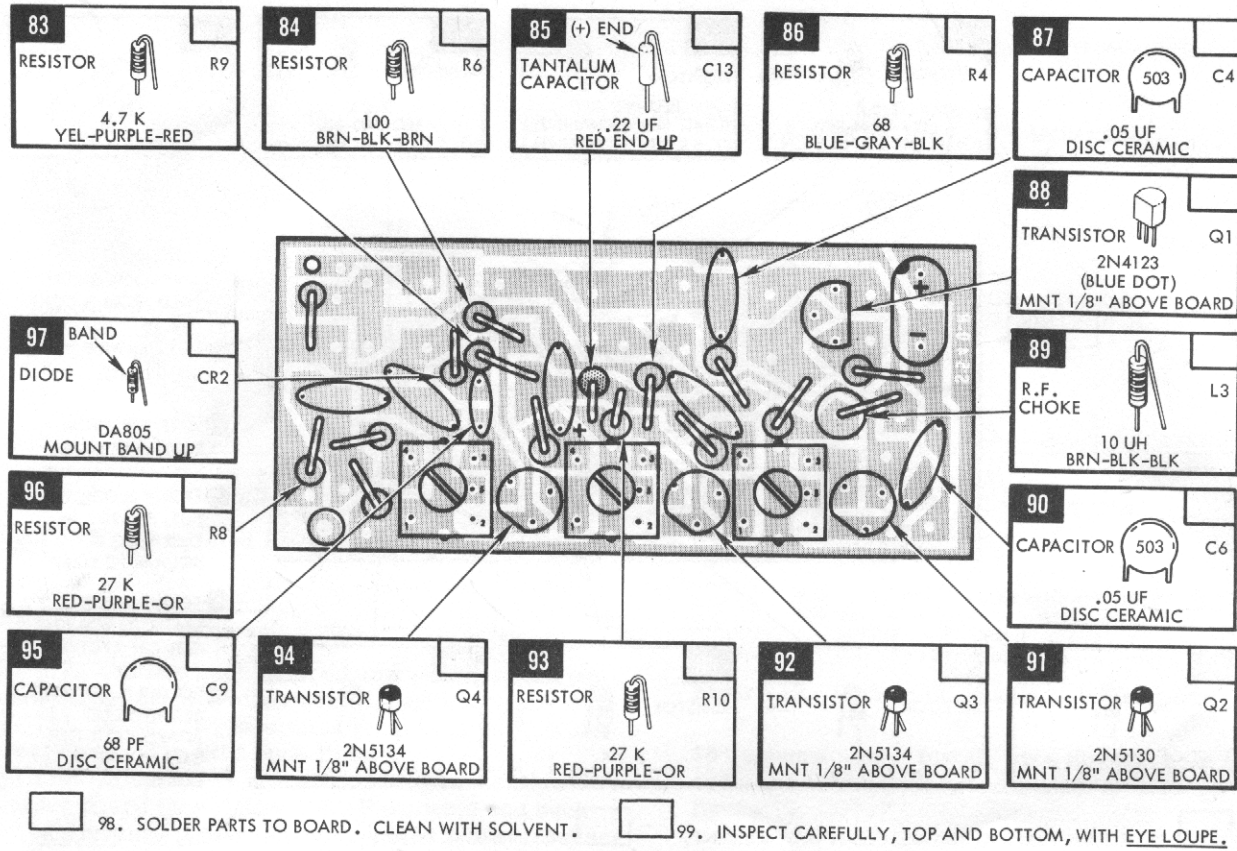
Basic Receiver Assembly (Sheet 2 of 2)
